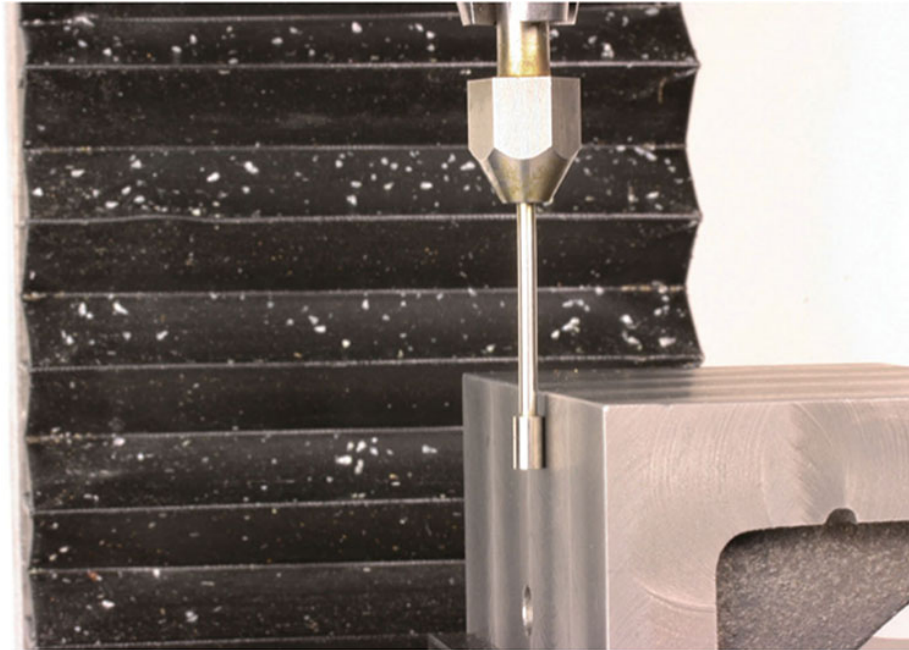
A wiggler arm rotating concentrically with the spindle axis.
